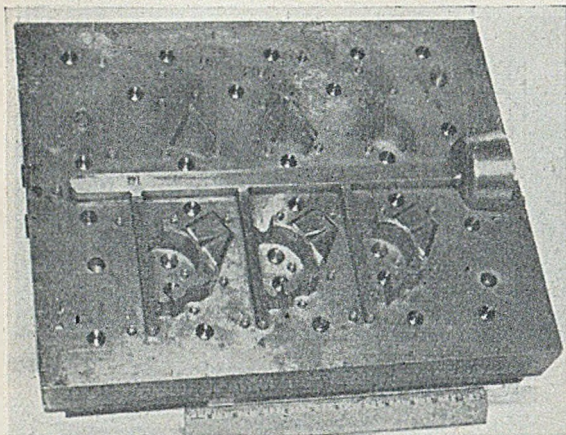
Patternplate 18 by 22 in. for a Motor Bracket.
